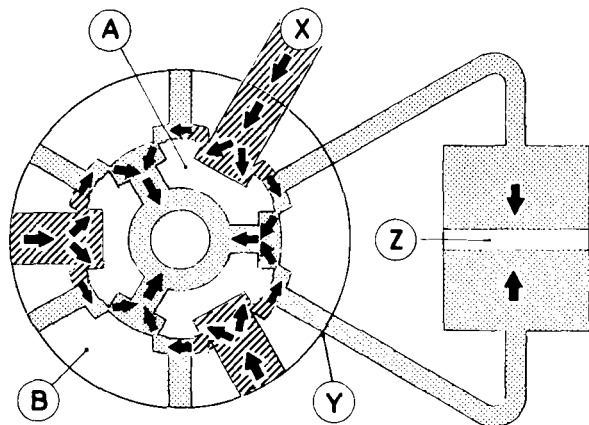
Operating diagram of the rotor valve (straight ahead) A Rotor B Sleeve X Pump pressure Y Reservoir pressure Z Equilibrium.
